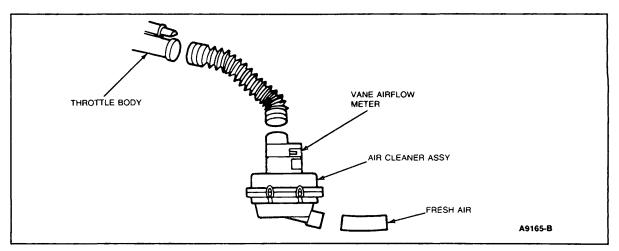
Typical Air Cleaner System — 1.9L EFI (Passenger Car)
